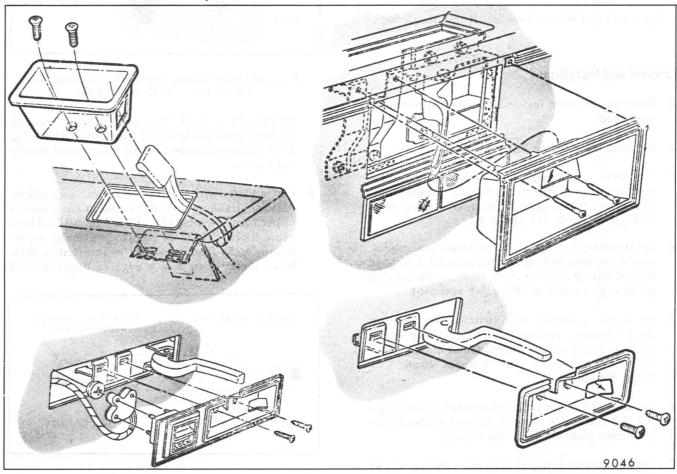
Typical Door Lock Remote Control Handle and Cover Plate Installations - "B, C and E" Styles
